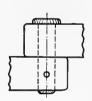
An incorrect design because it requires removal of the small pin for disassembling.
